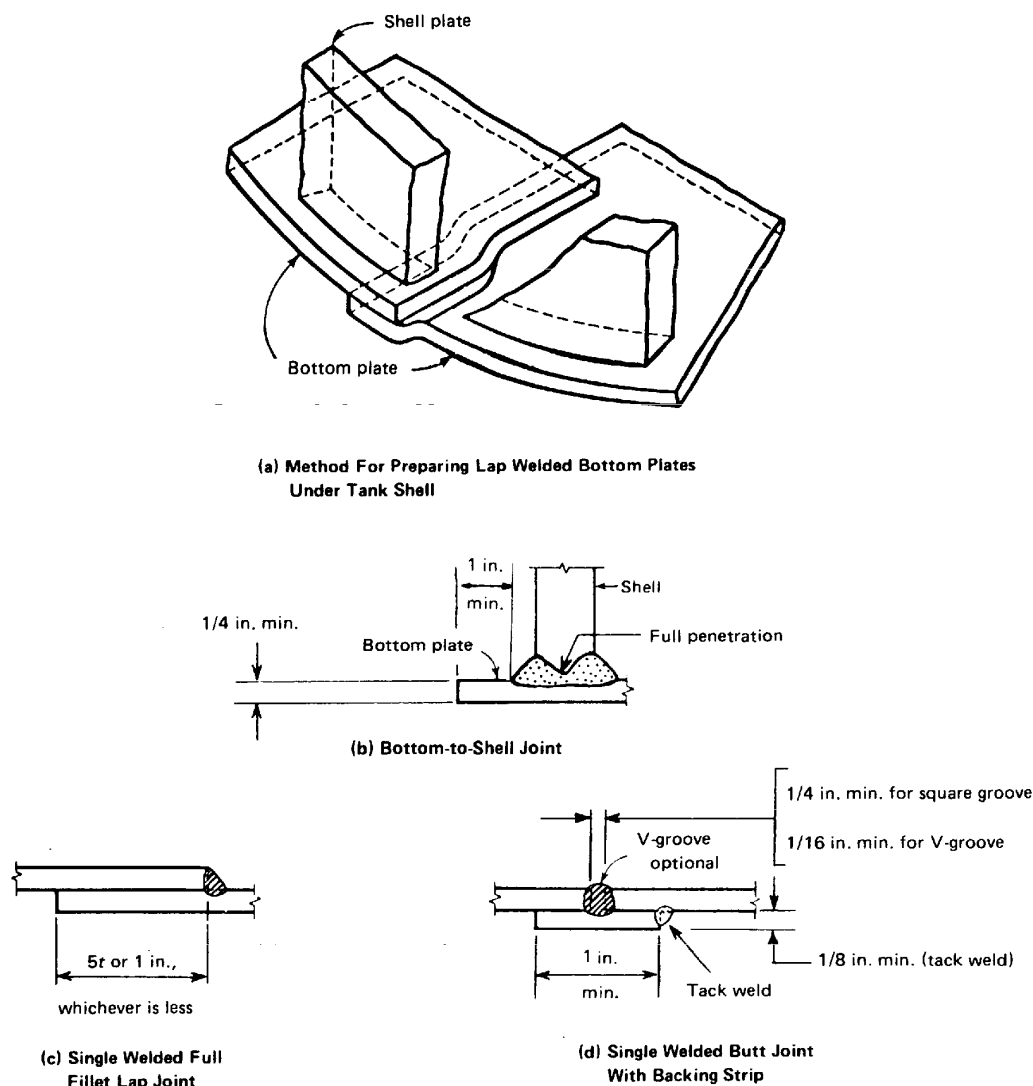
(a)-1 TYPICAL BOTTOM AND BOTTOM-TO-SHELL JOINTS
